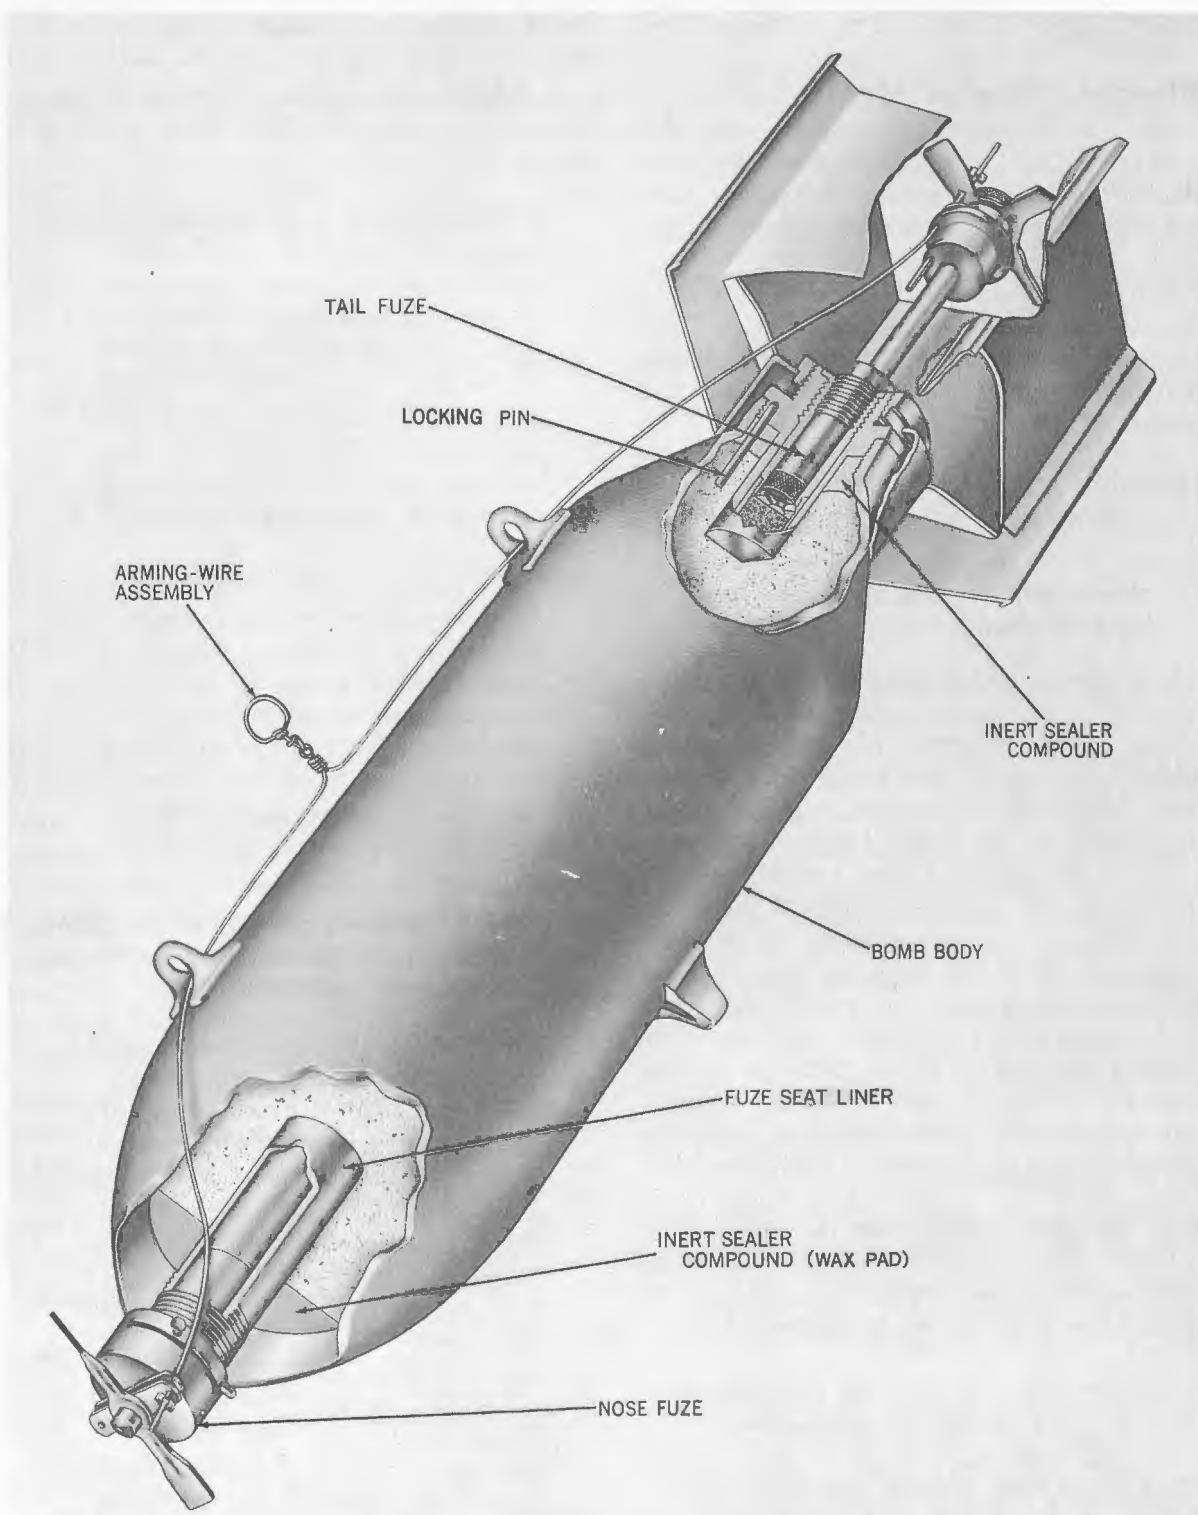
100-lb GP Bomb AN-M30A1 with Fin Assembly AN-M103A1, Cutaway View.
